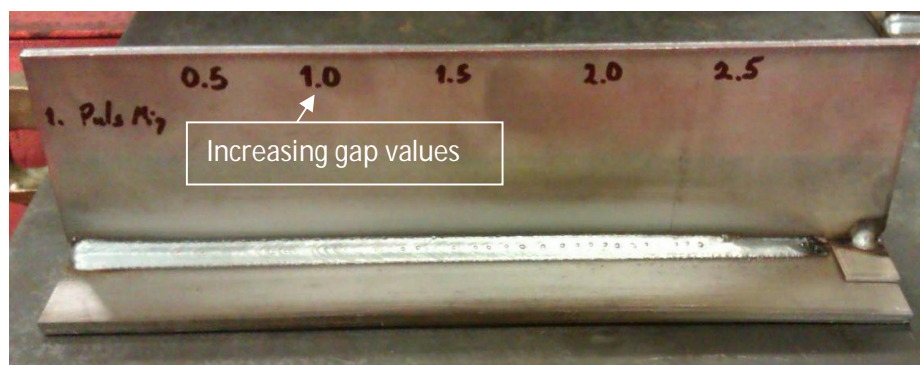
Increasing gap values bead appearance of the Synergic Pulsed GMAW process welded specimen.
